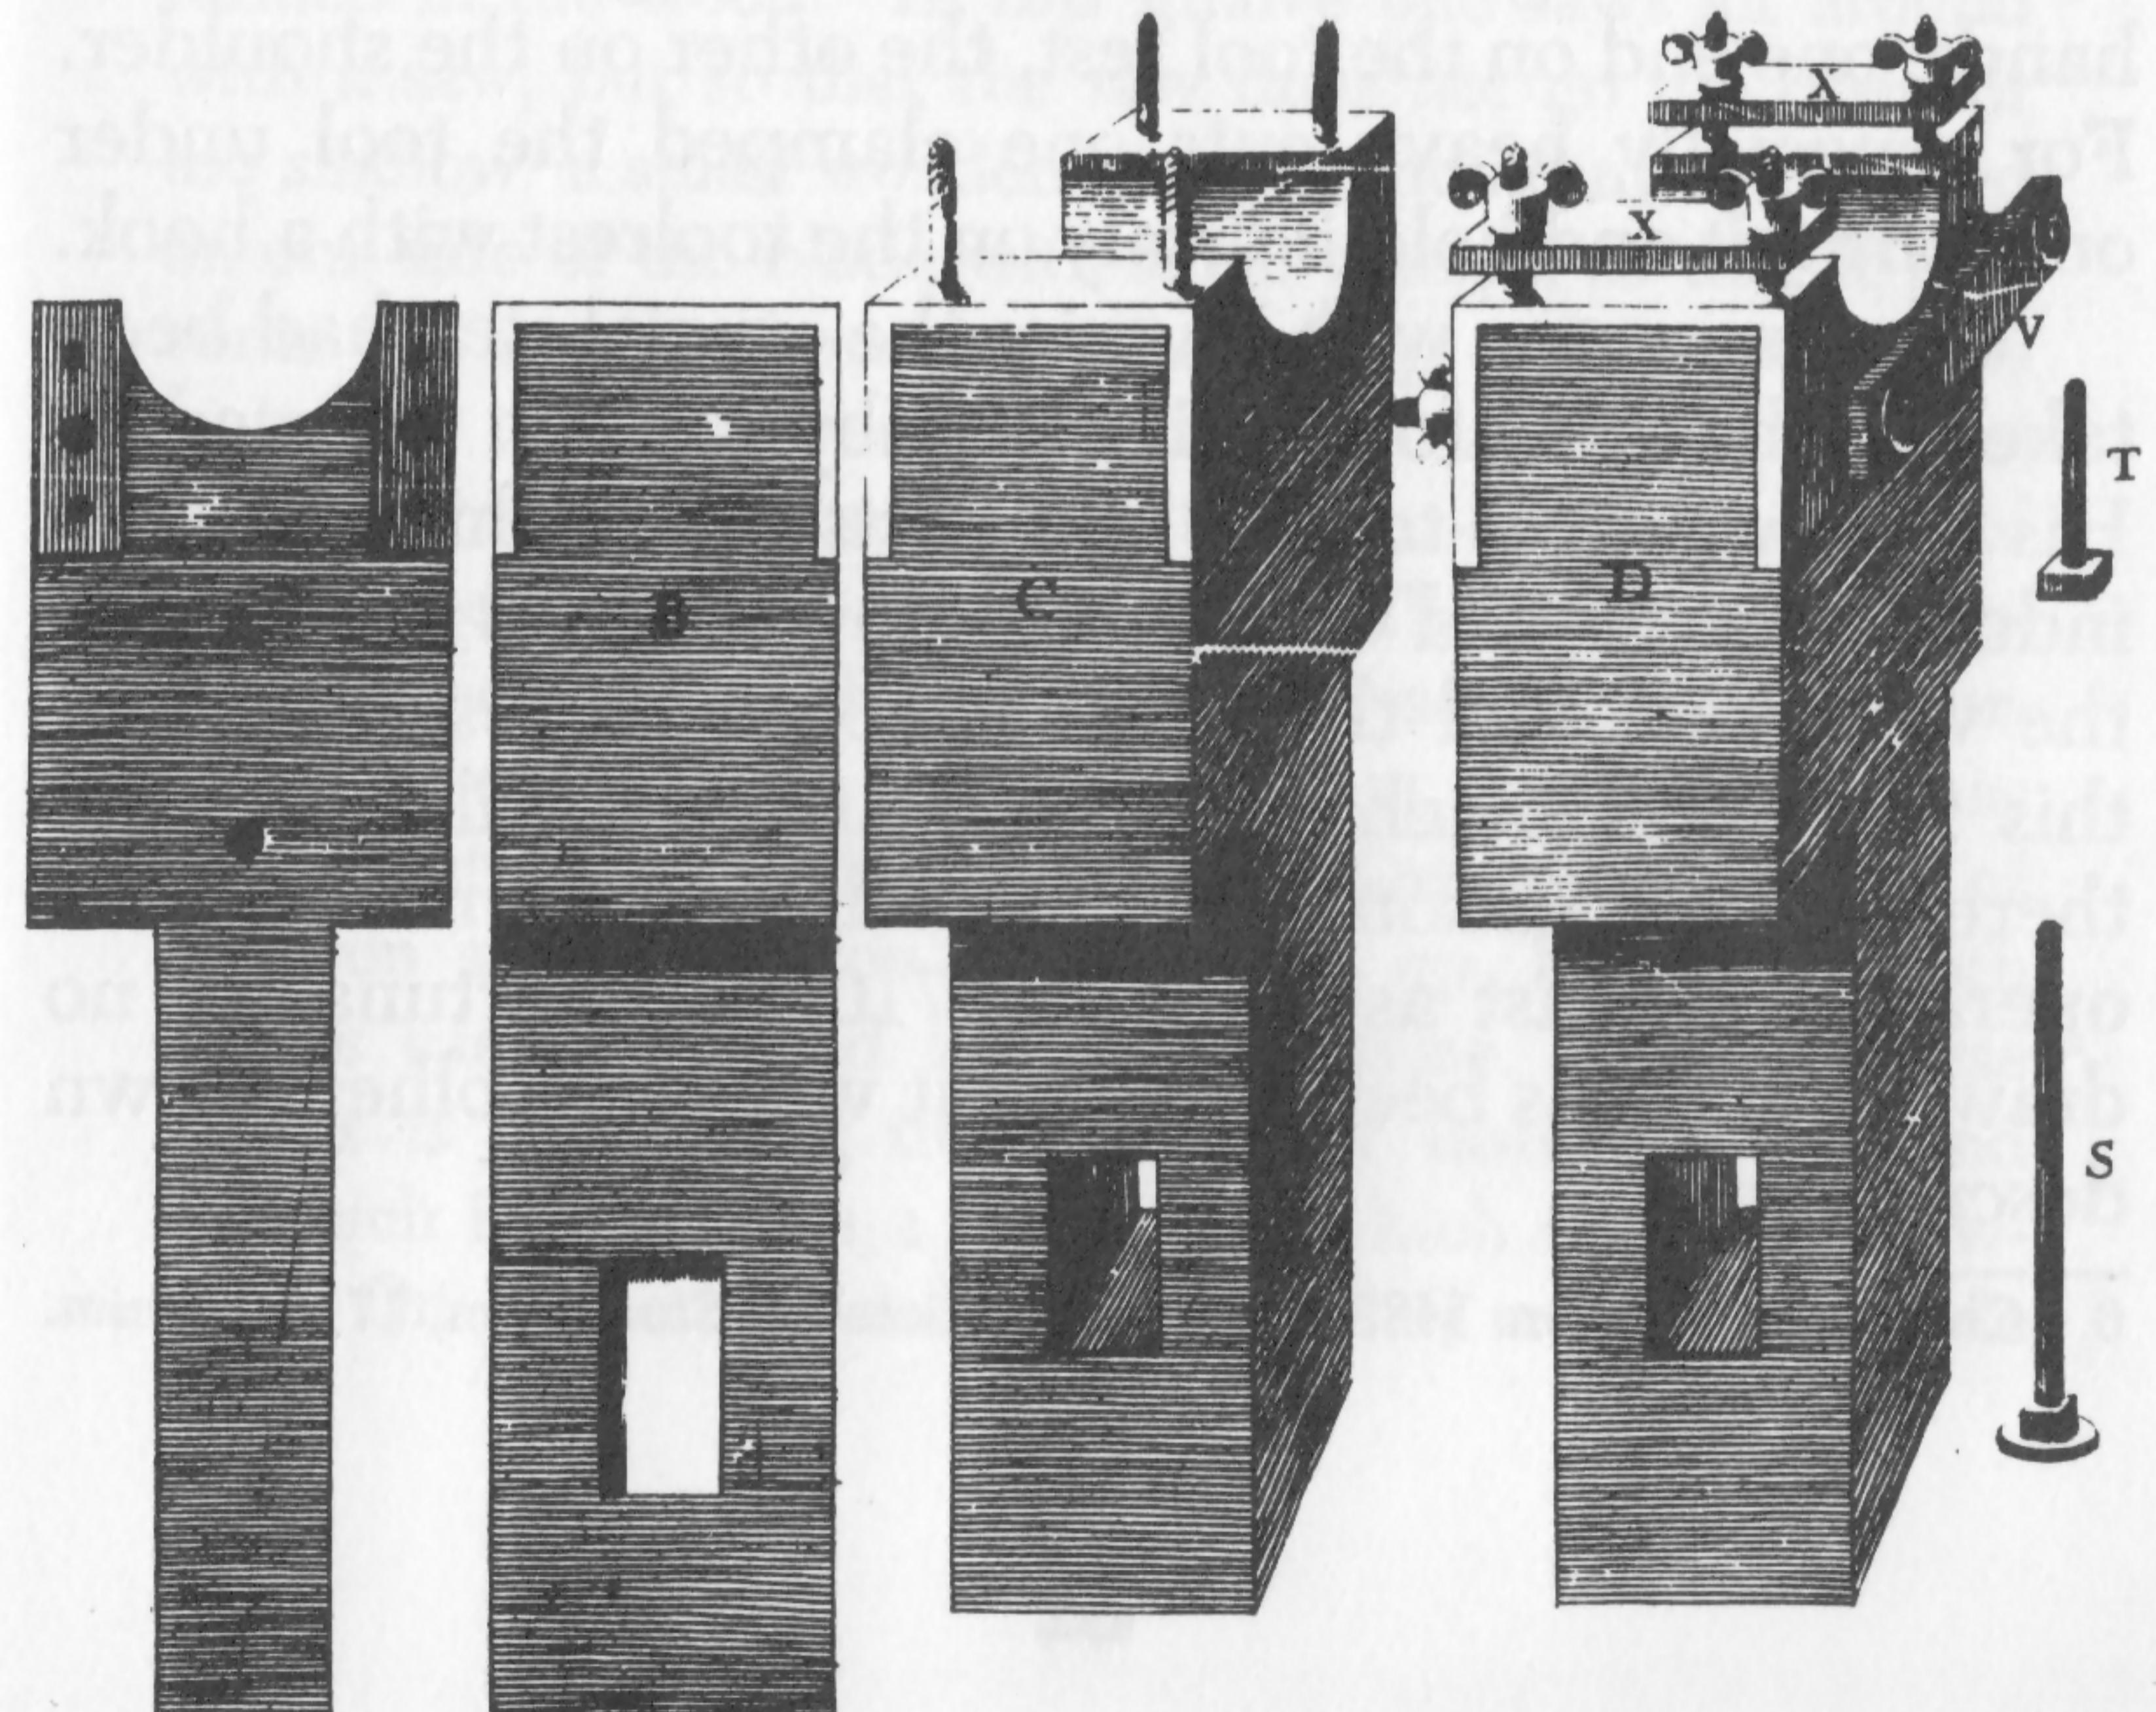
SPINDLE BEARINGS FOR THE METAL-CUTTING LATHE, 1701. (Plumier)
